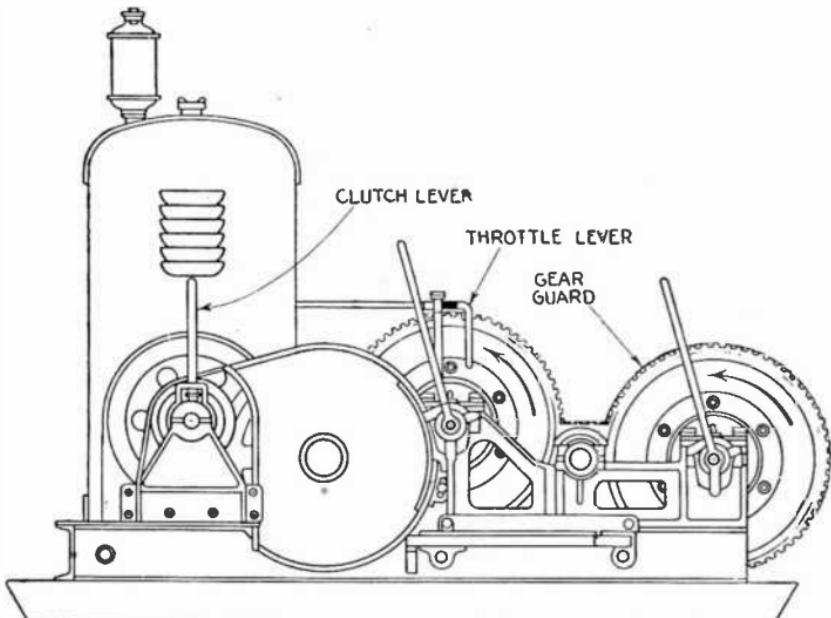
,869.—Novo double drum gas engine hoist powered with four cylinder radiator cooled engine. It will handle two large material elevators. Some contractors have this hoist fitted with an 18 in. or 22 in. diameter drum to handle concrete tower bucket with high speed and a standard drum to handle "Chicago" derrick or miscellaneous steel or platform elevators.
